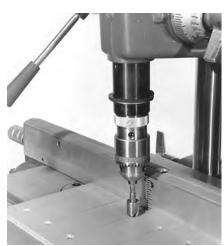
A special tool called a countersink forms the inverted cone that allows countersunk screws to seat flush with work surfaces. Use the depth control to obtain identical countersinks.
